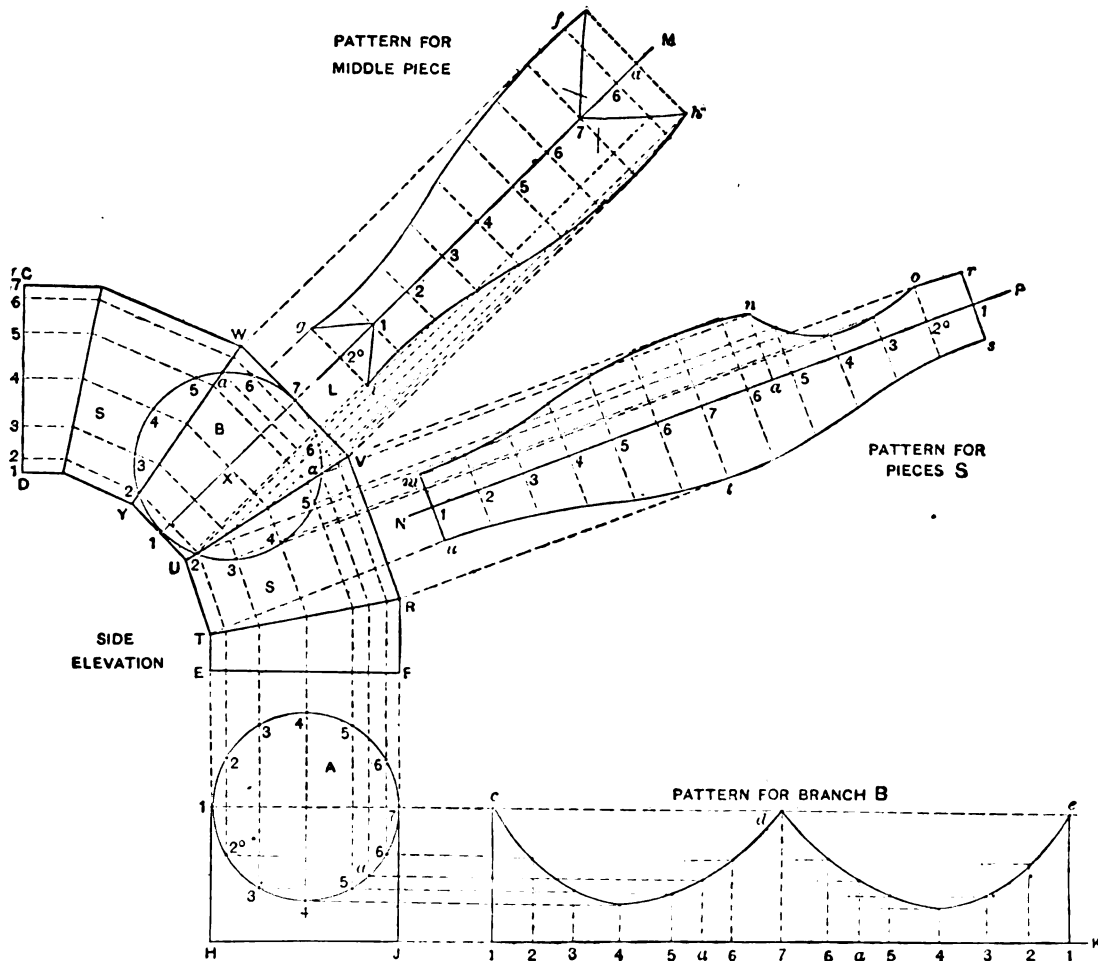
Elevation, Sections and Patterns for Branch Intersecting Side of Elbow
